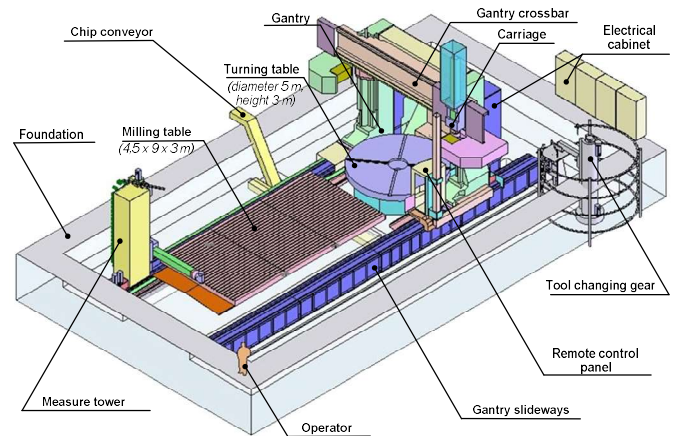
The sketch of the machine tool and operator are shown in the scale model
